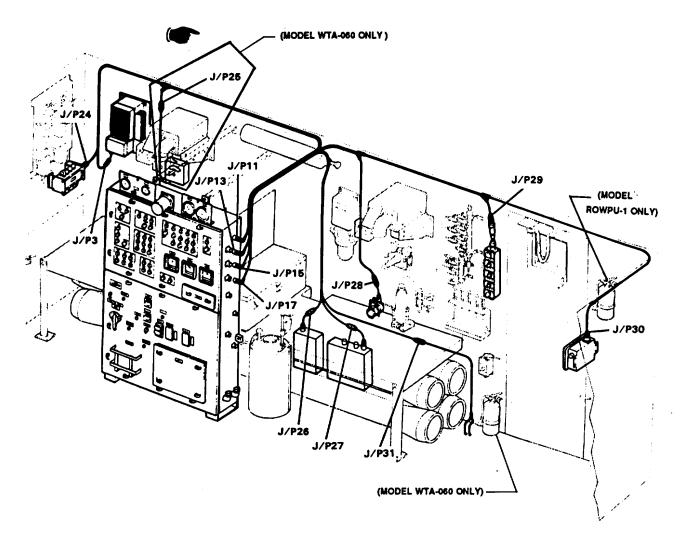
Electrical Installation (sheet I of 8) Primary Harness, Rear Wall, W-33
